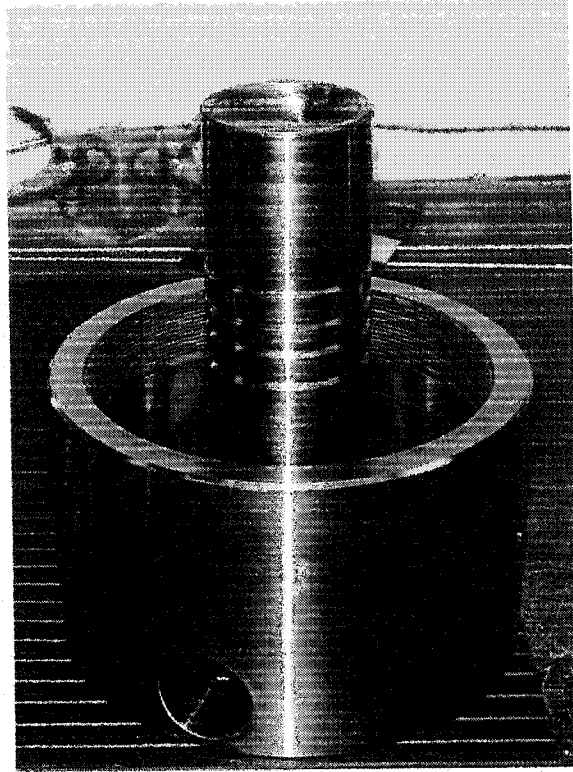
Photo of Sealing Mechanism Set-Up
